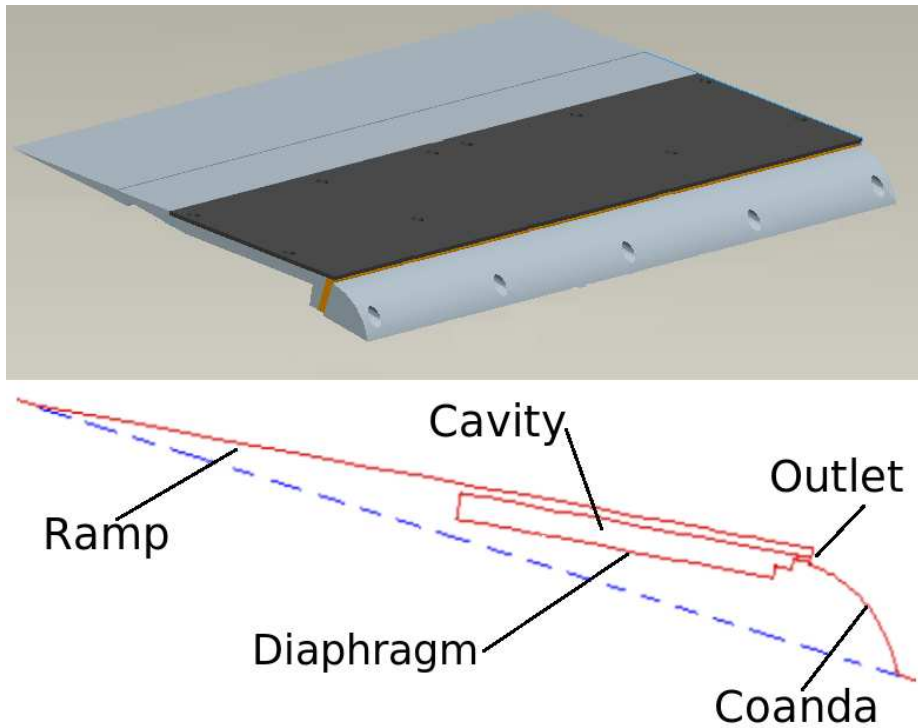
Detail of the actuator. 3D CAD view (Top). Sectional view with parts (Bottom)
